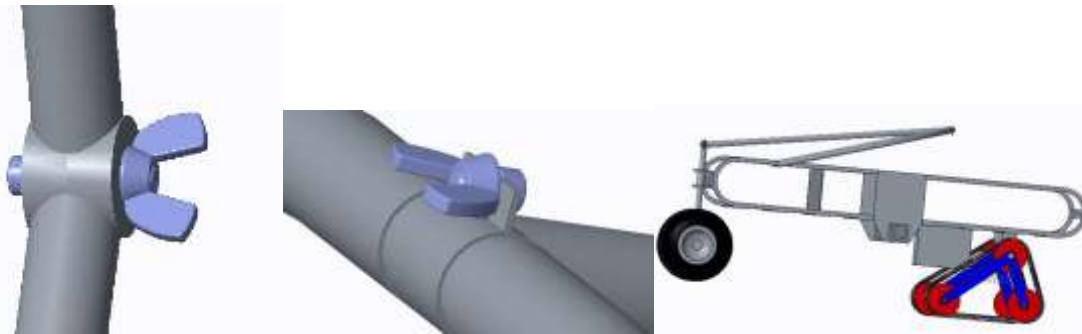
Steering mechanism components. Wing nut are used as components to (Left) collapse the pinned joints for the axle and extension bar and (Right) the collar for the handle. Middle: Right: Beach Cart in retracted position.
